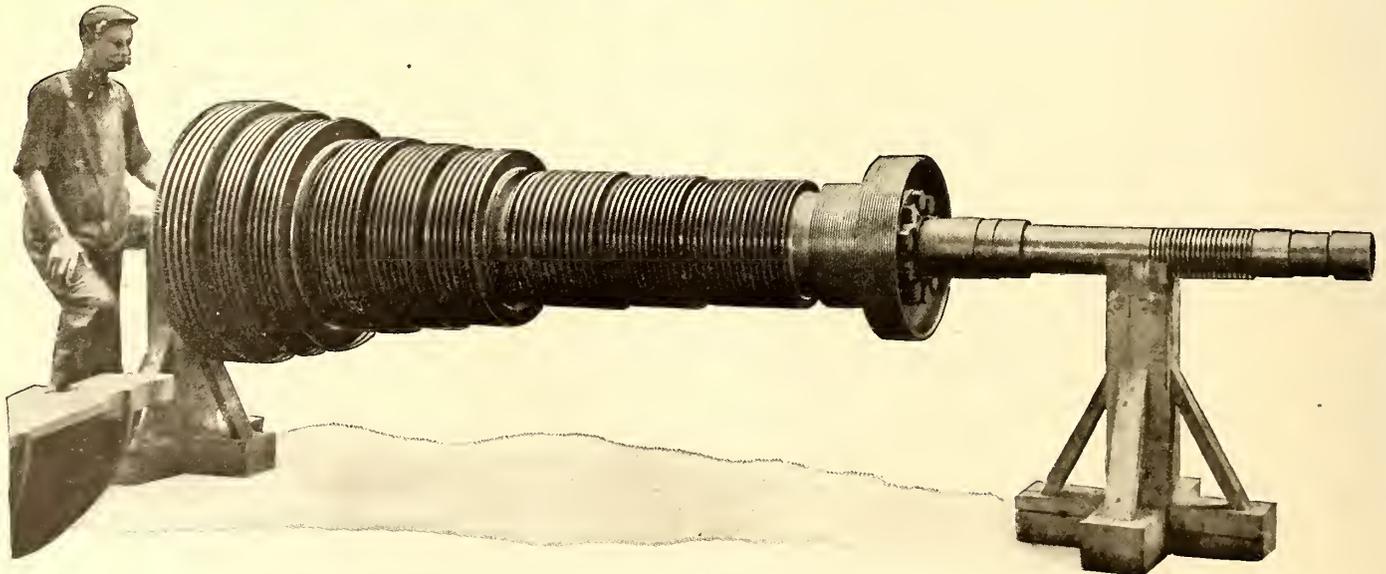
SPINDLE OF 1500-KW STEAM TURBINE
